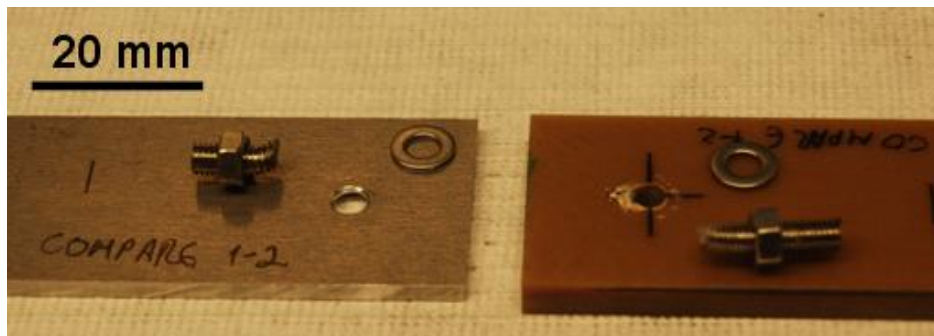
Aspects of the fractured bolted comparison specimen showing rivet shear failure mode.
